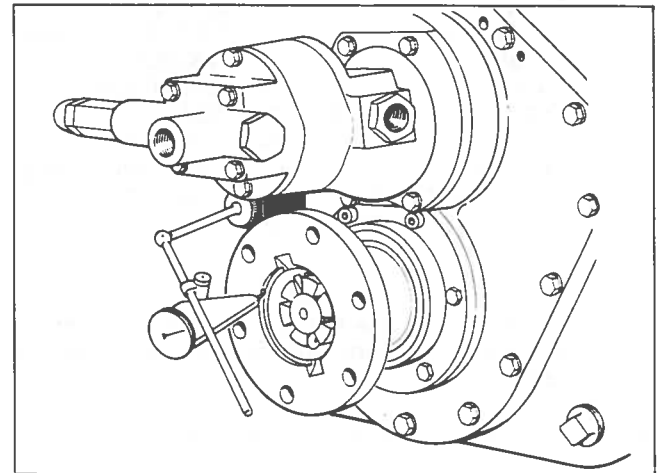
Checking Pilot Ring Bore Diameter for Trueness.
